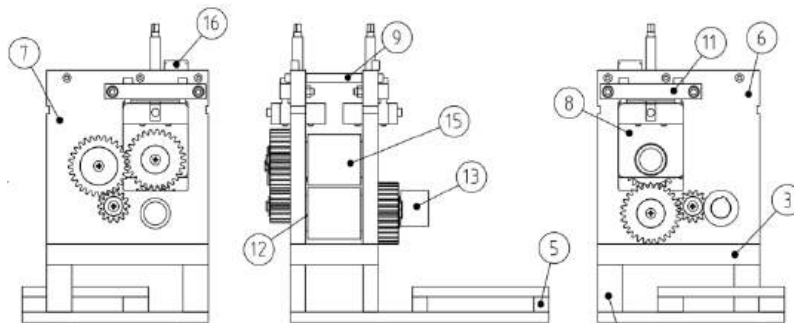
Two-dimensional CAD of the small-scale cold rolling mill designed in this study
